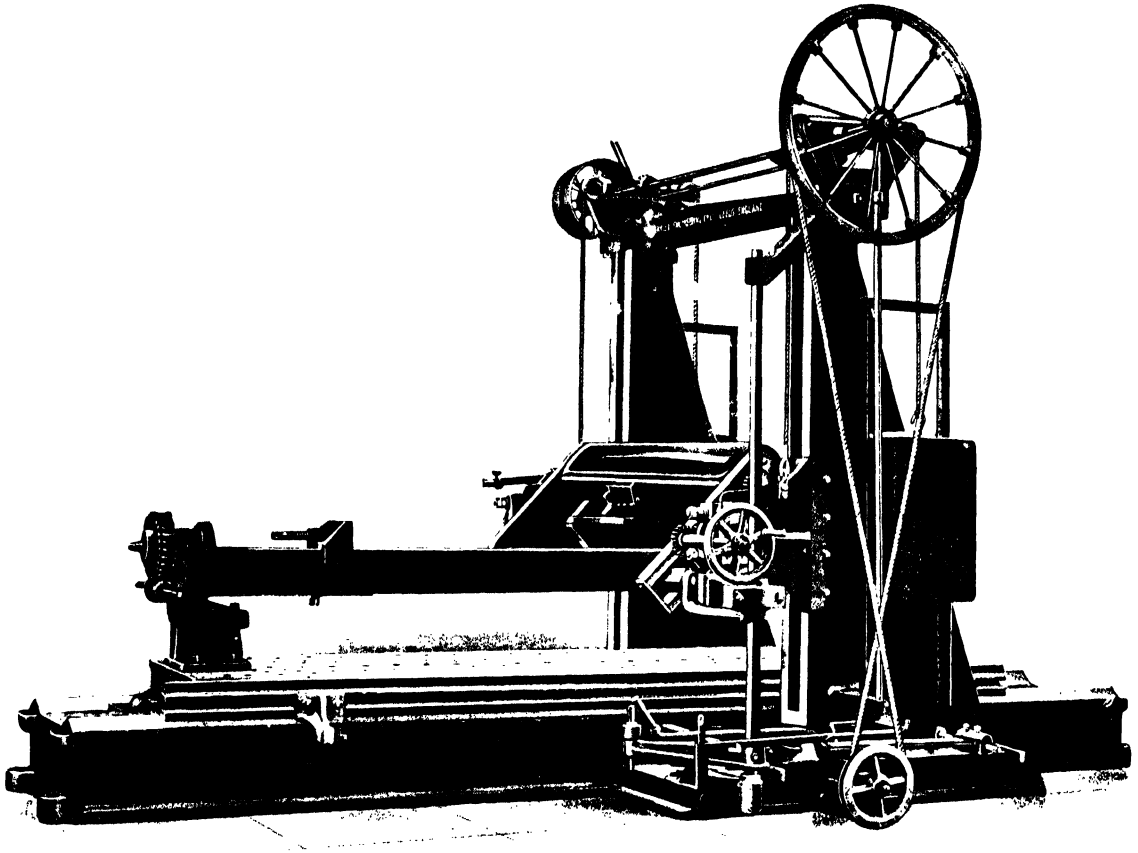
MOULDING MACHINE, PROVIDED WITH TURNOVER TOOL HEAD AND ROCKING TABLE
